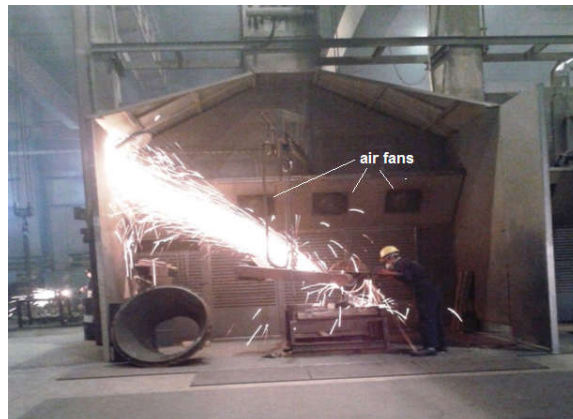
A worker while grinding with the pendulum-grinder (Photo taken by the Author)
